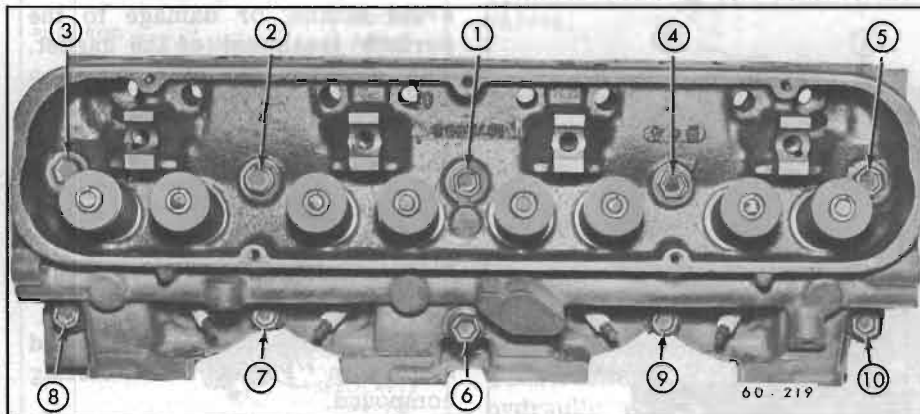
Cylinder Head Bolt Tightening Sequence
